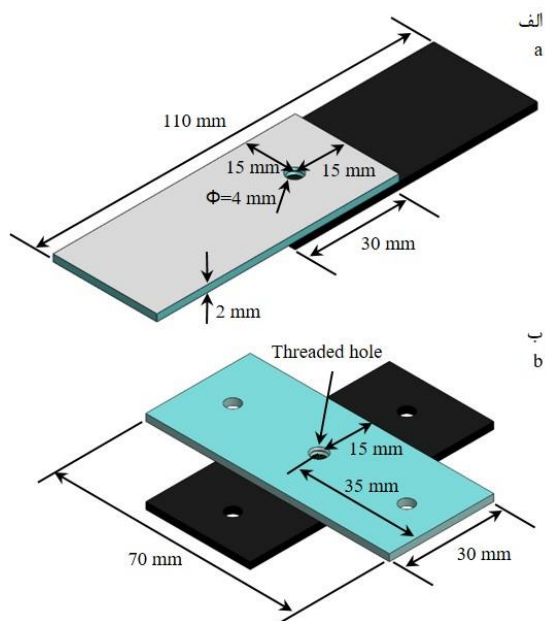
Schematic of tensile testing specimens and their dimensions: a) Shear-Tensile specimen and b) Cross-Tension specimen
